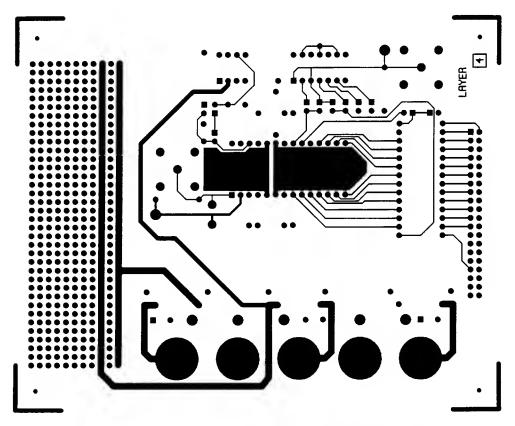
Solder Side PCB Layout (Not Shown to Scale)
